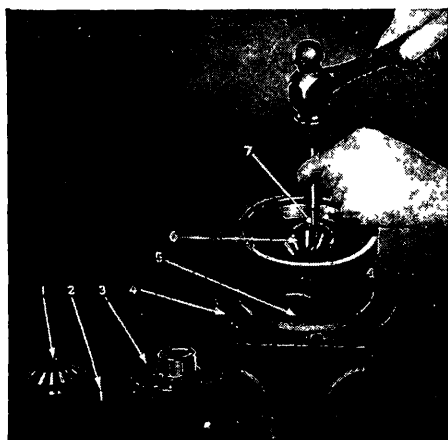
Removing differential pinion shaft lock pin, 1940-50 Chrysler Imperial and all 1951-52 V8s
